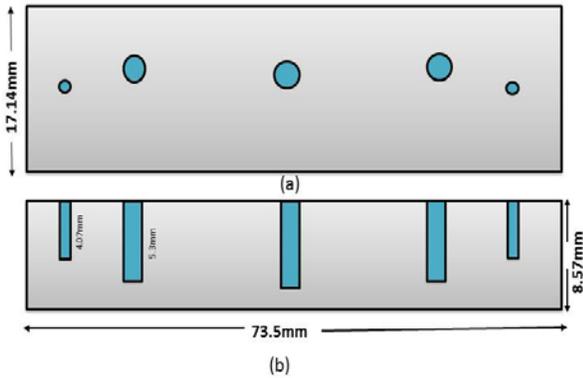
Physical layout of the Filter-I (a) Top view (b) Side view
